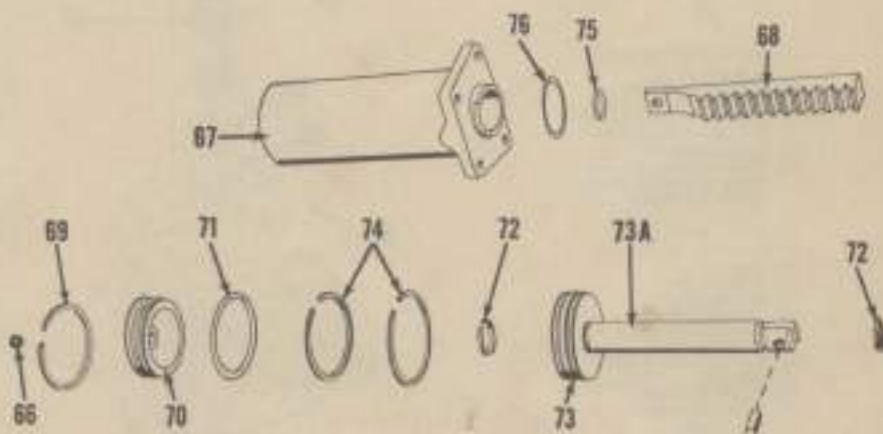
Exploded view of the power steering ram (cylinder) typical of all models except D-14 and D-15 non-diesel.
